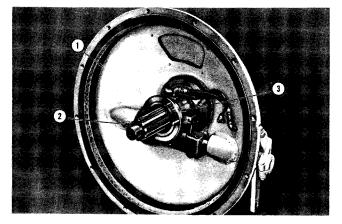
CLUTCH HOUSING, REMOVED 3. Release Bearing 1. Housing 2. Clutch Shaft
